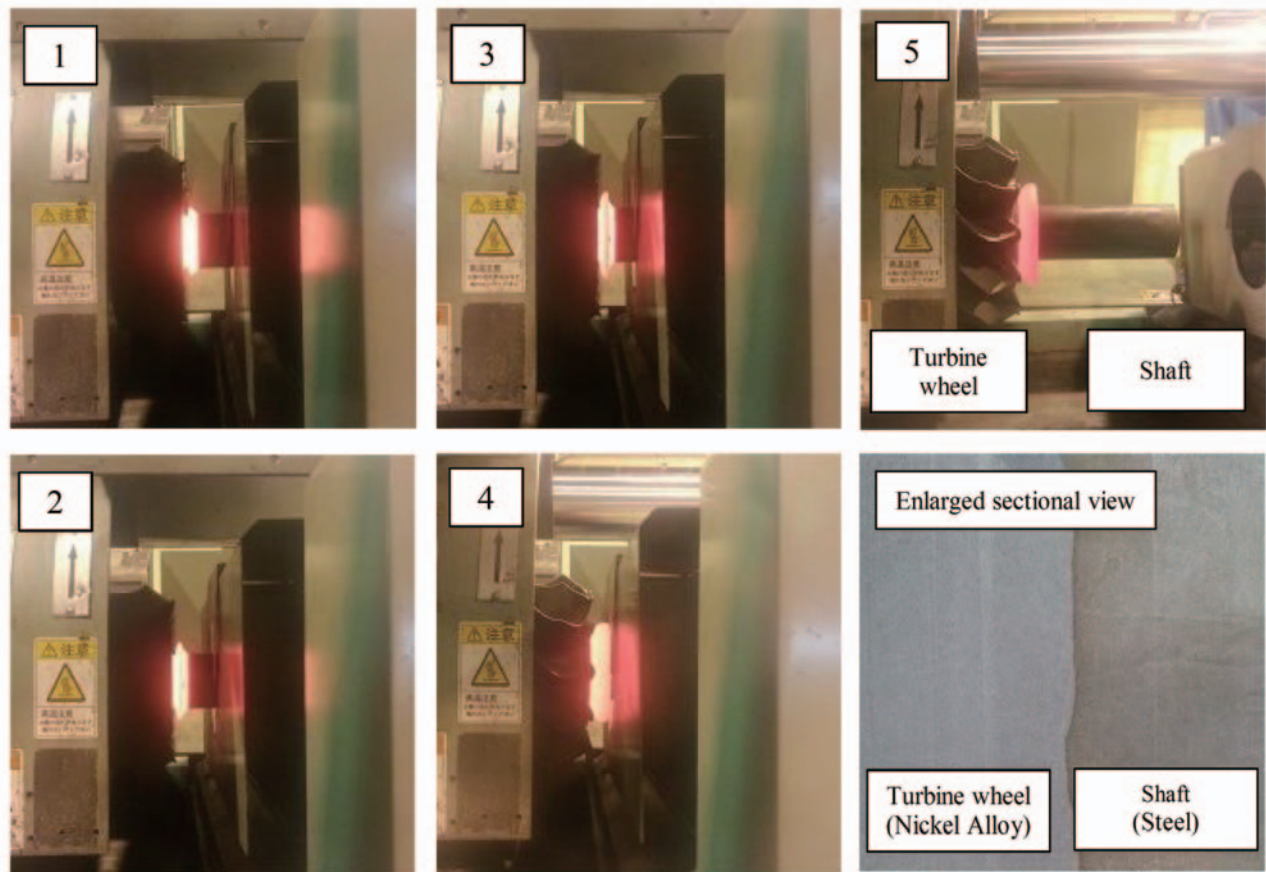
Process of friction welding and sectional view of turbine rotor
